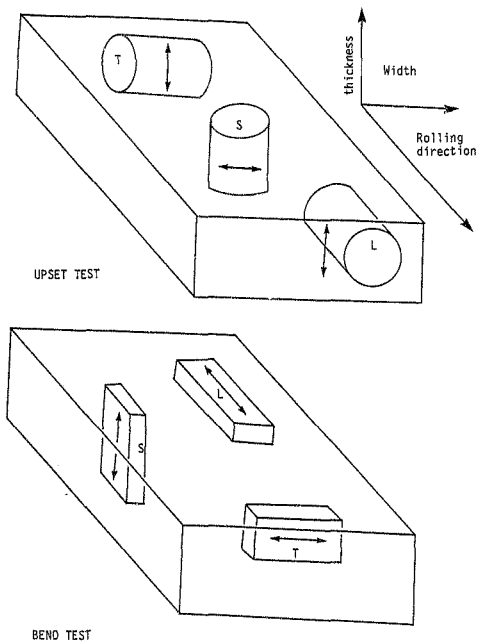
Illustration of possible test specimen orientation and critical tensile stress direction of upset tests and bend tests for fracture surface anisotropy determination (Ertürk¹¹⁵)
